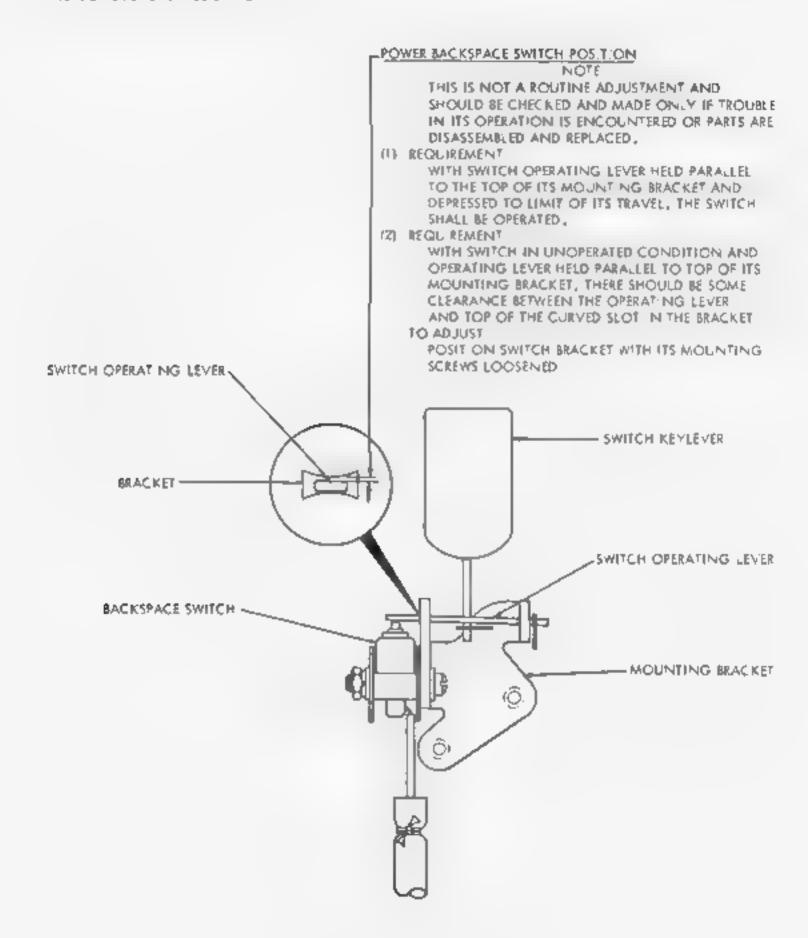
KEYBOARD POWER BACKSPACE SWITCH
